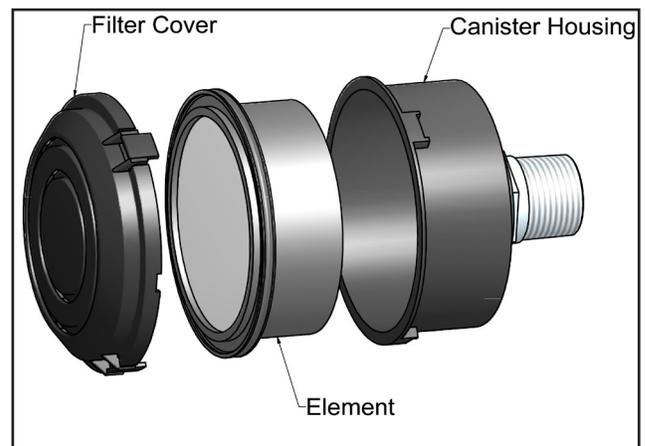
A Air Intake Filter (Without Piped Inlet)
